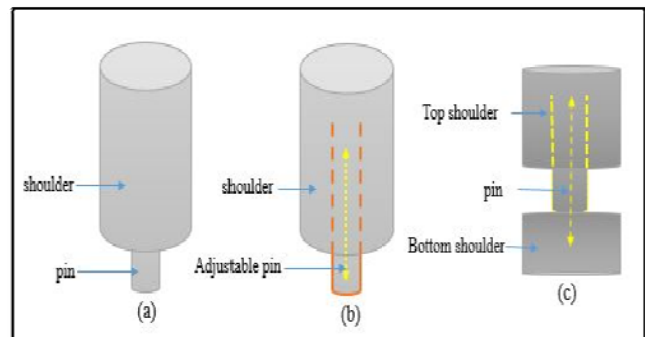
a. Fixed, b. Adjustable and c. Bobbin type tool
